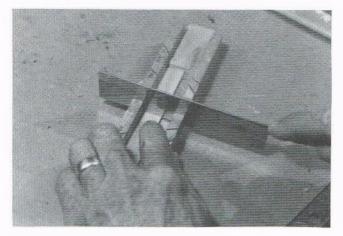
The length of board is measured and marked with the depth gauge. Then it can be cut off in the miter box. Carefully position the board so that the edge of the saw blade lines up exactly with the outside edge of your mark. In cases where several pieces are to be cut to the same length a stop block is used in the miter box. This is a hardwood block cut square on the ends and just wide enough to provide a tight, sliding fit between the fences of the miter box (top, center). Once set at the required distance from the 90° position in the box (with a marked piece of wood and the saw in place) additional pieces of identical length can be easily cut. But always blow the sawdust out of the box between cuts. In miniature the smallest amount of sawdust, scooped up by the end of the board as you slide it into place against the stop block, can throw your measurements off.
